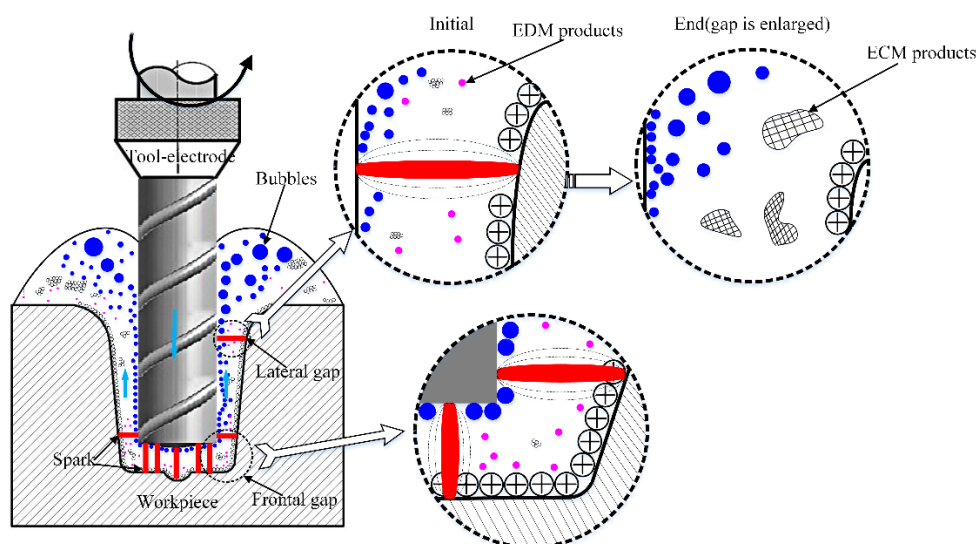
Mechanism of material removal in the ECDD process with a high-speed rotating helical tool-electrode
